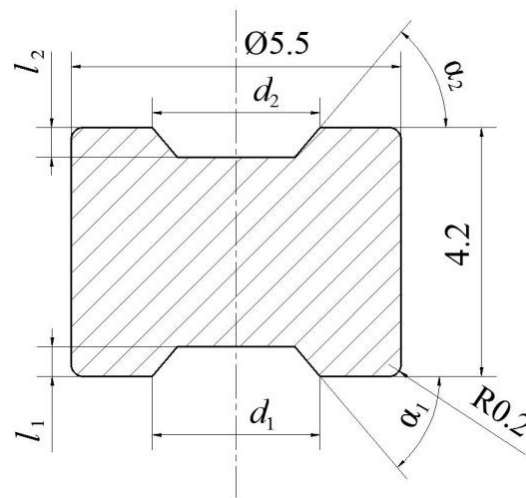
Cross-sectional geometry of the reshaping rivet
